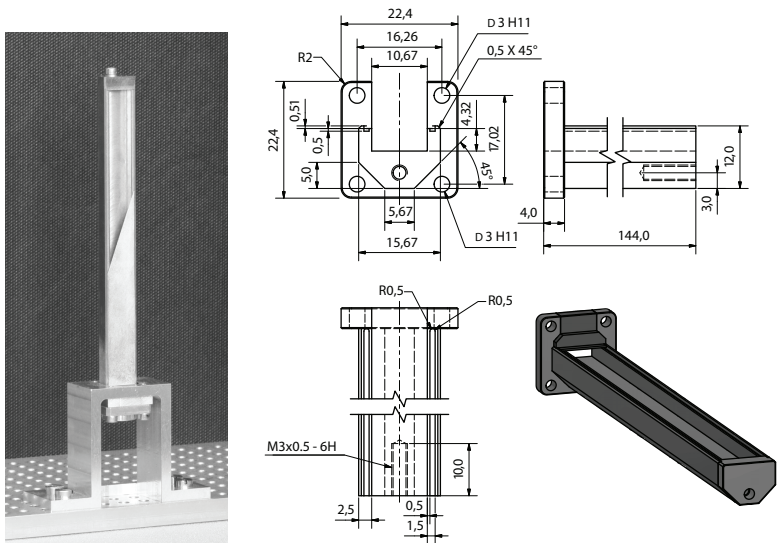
Photograph (left-hand part) and technical drawing (right-hand part, with millimetre dimensioning) of the waveguide structure.
